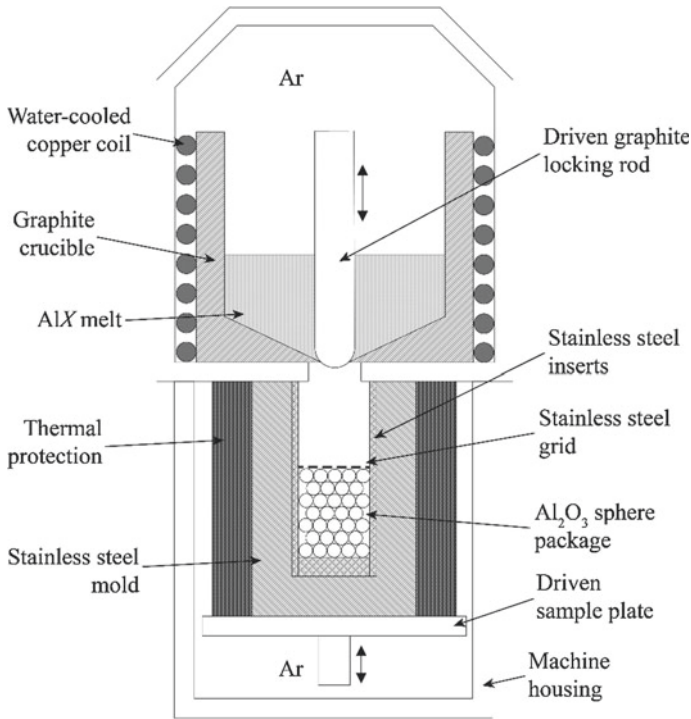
Schematic setup of the modified and simplified low-pressure casting method within an Indutherm VC500 casting machine. The figure shows the process in the *melting* stage right before the *casting* and *infiltration
